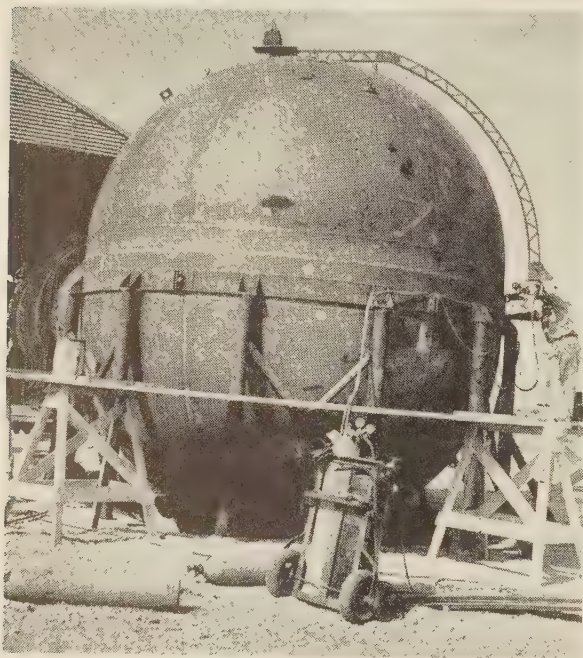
TWO HEMISPHERICAL BULKHEADS WELDED TOGETHER FOR PRESSURE TEST AND BEING SEPARATED BY FLAME-CUTTING
